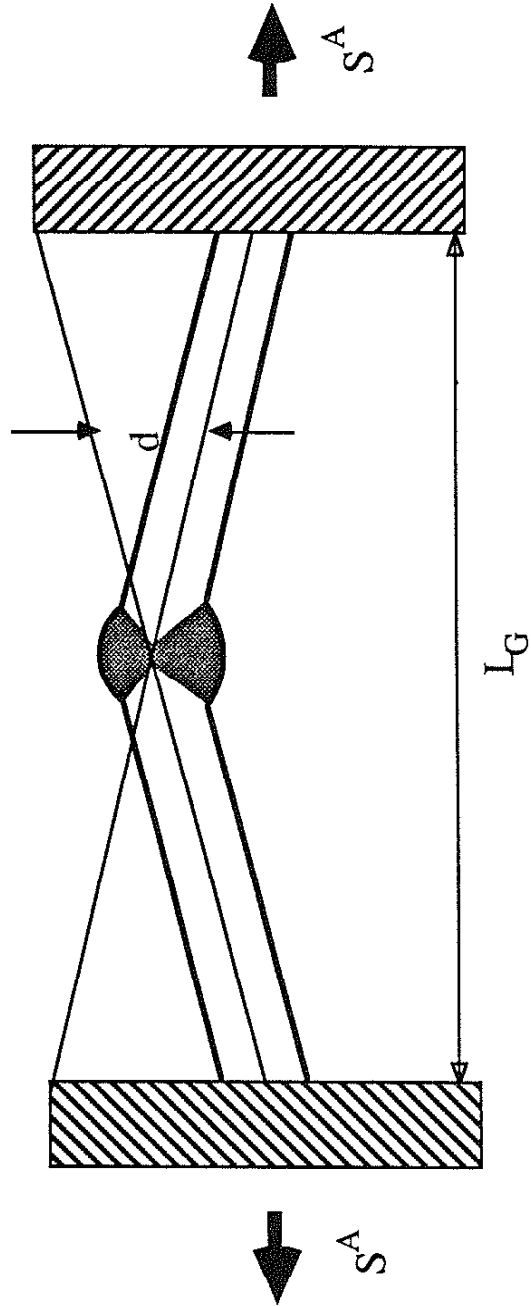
Schematic description of the specimen with welding distortion for the use of Eq. 26 [42].
